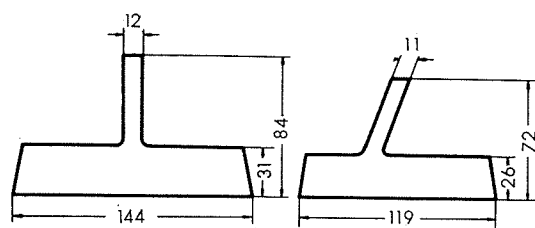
Sizes and dimensions of extruded 7075-T6 aluminium alloy shapes.
